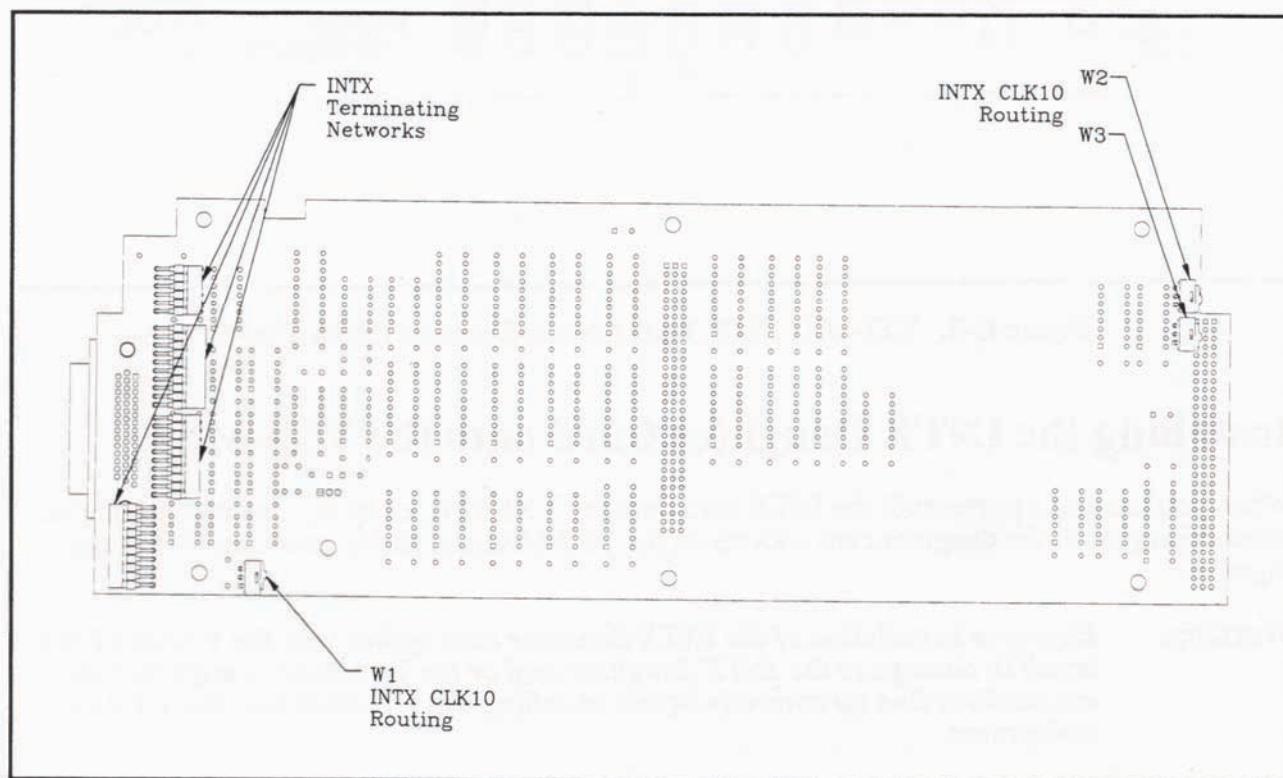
VXI-MXI INTX Parts Locator Diagram (Rear View)
